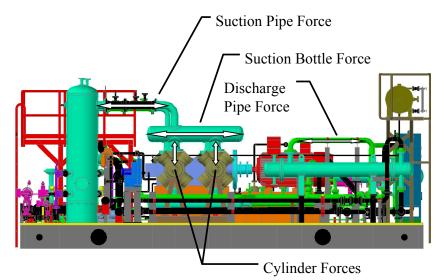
Some Shaking Forces in a Reciprocating Compressor Package
